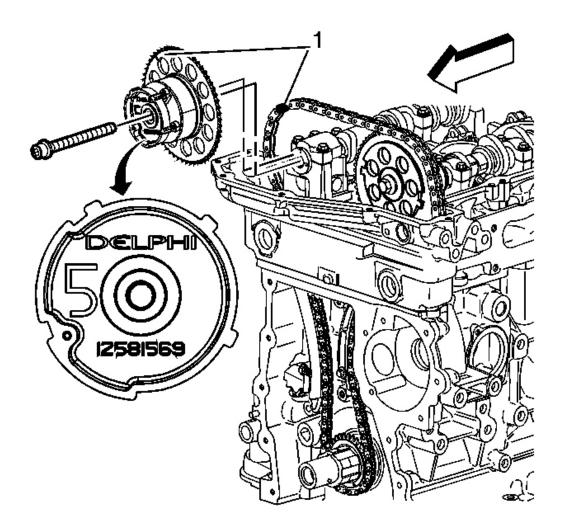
View Of Exhaust Camshaft Actuator Courtesy of GENERAL MOTORS CORP.
